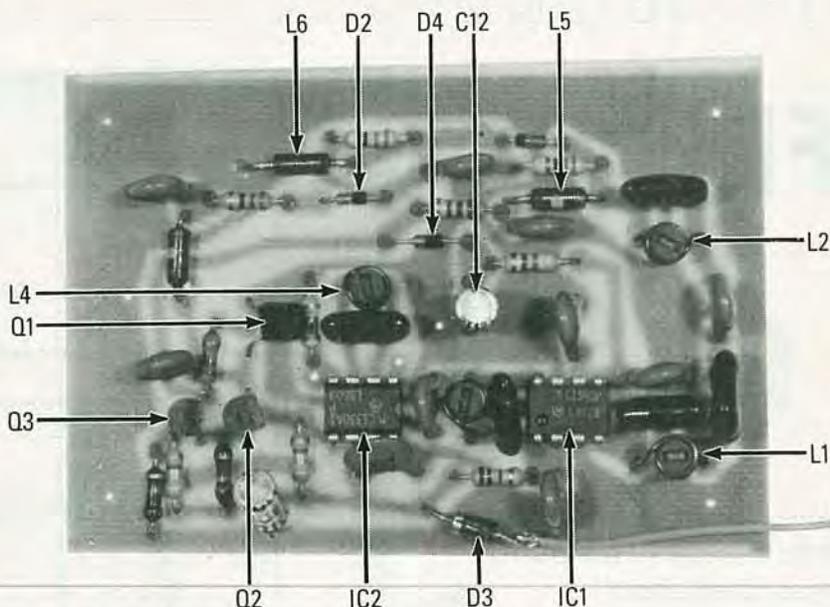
THE FINISHED OUTBAND DECODER is shown here.
